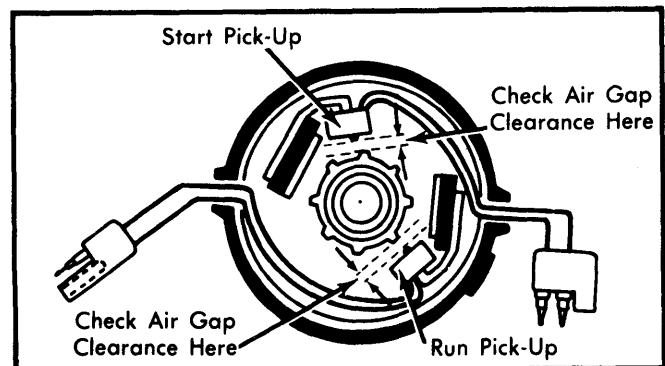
Pick-Up Coil Air Gap Adjustment (Dual Pick-Up Shown, Single Pick-Up Similar)
